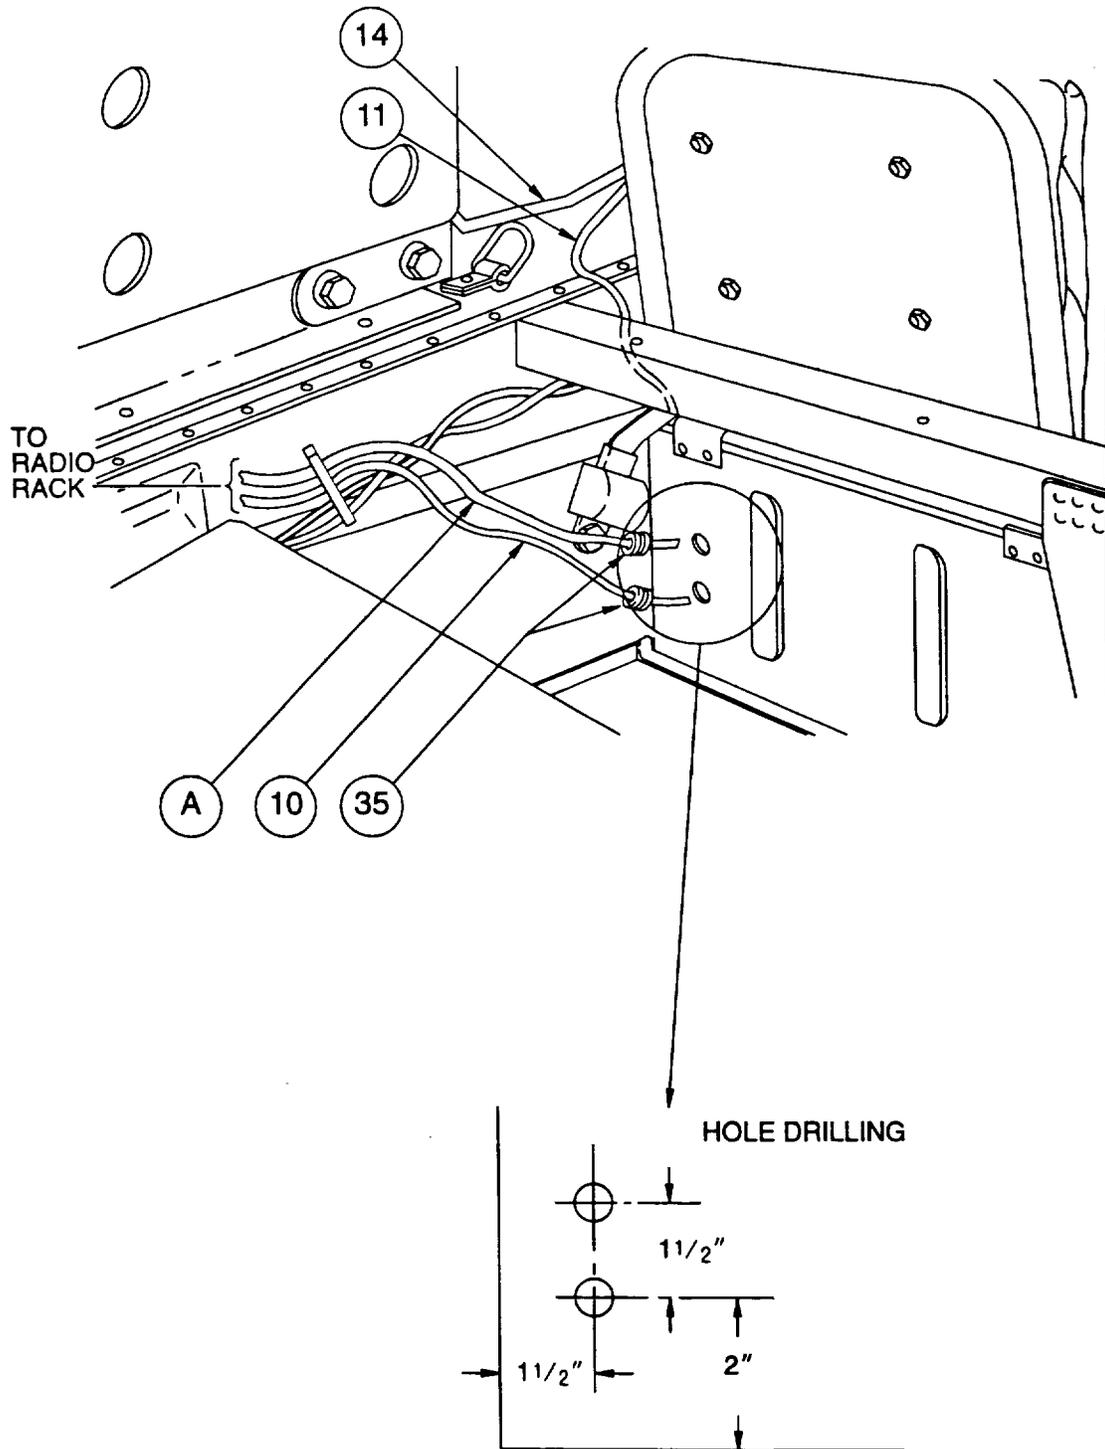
Battery Box Hole Drilling and Power Cables Routing
